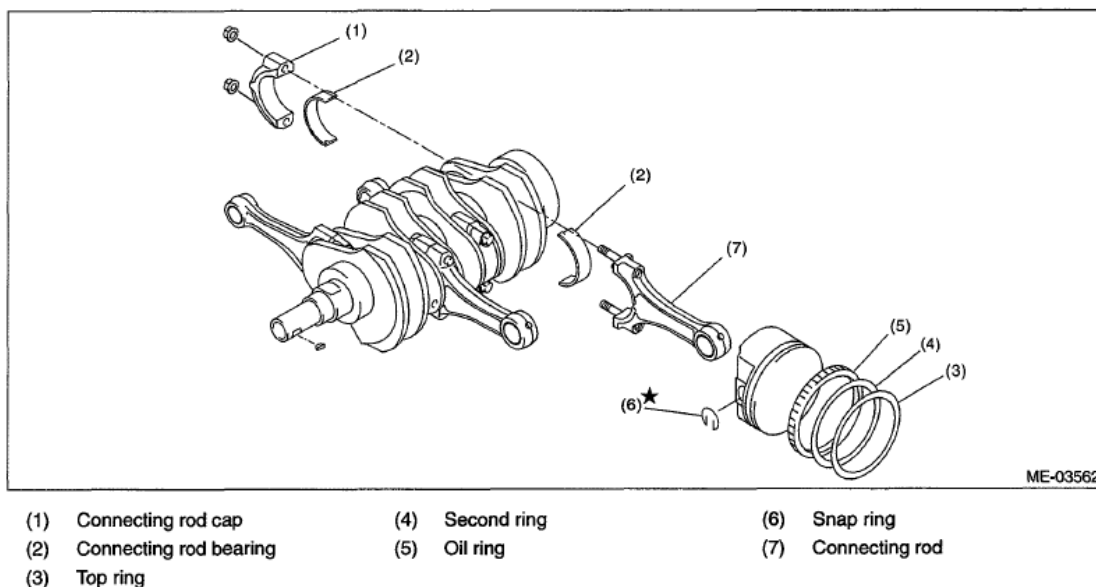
Identifying Connecting Rods, Connecting Rod Caps And Bearings
